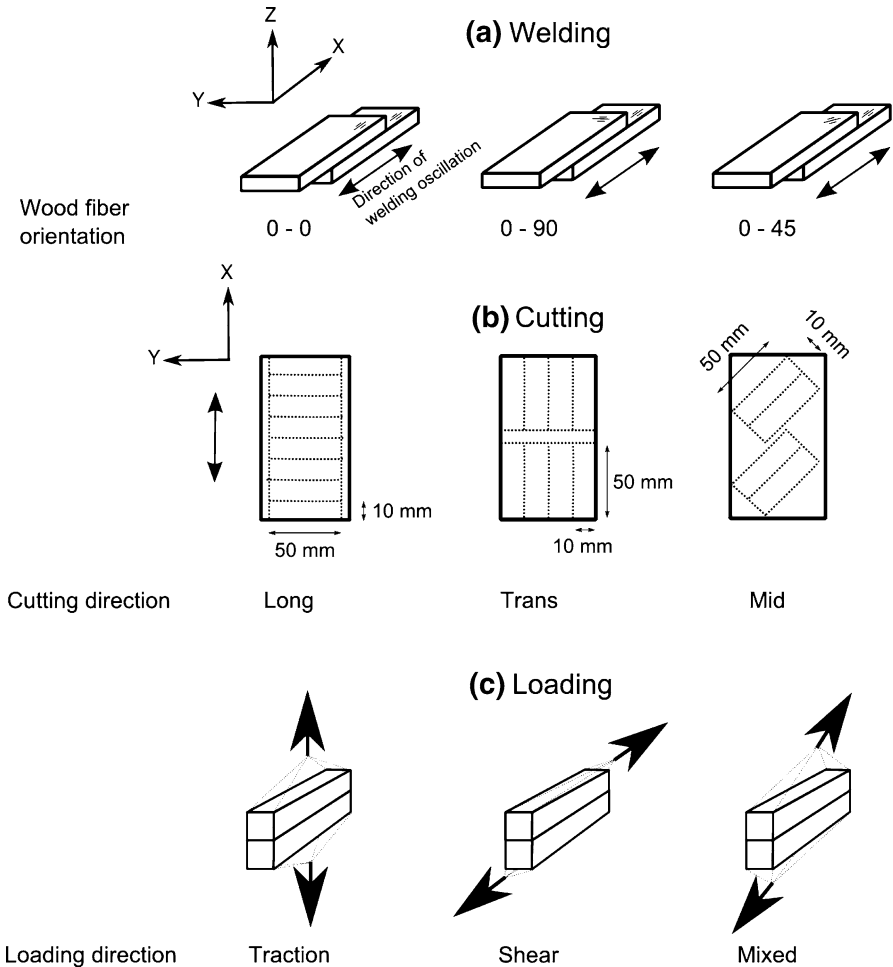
Schematic presentation of the preparation process and testing of the Arcan specimens. a Welding of the wood parts in parallel or cross-grain orientation followed by b specimen cutting in the welded piece in different cutting directions in the plane of the weld and finally, c mechanical testing with various testing angles
